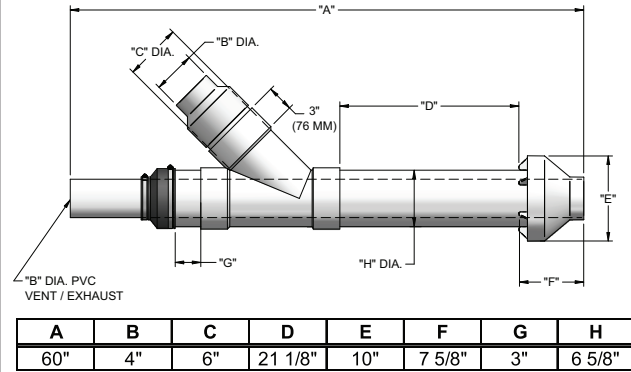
Concentric Vent Dimensional Drawing - Models 286 - 501
